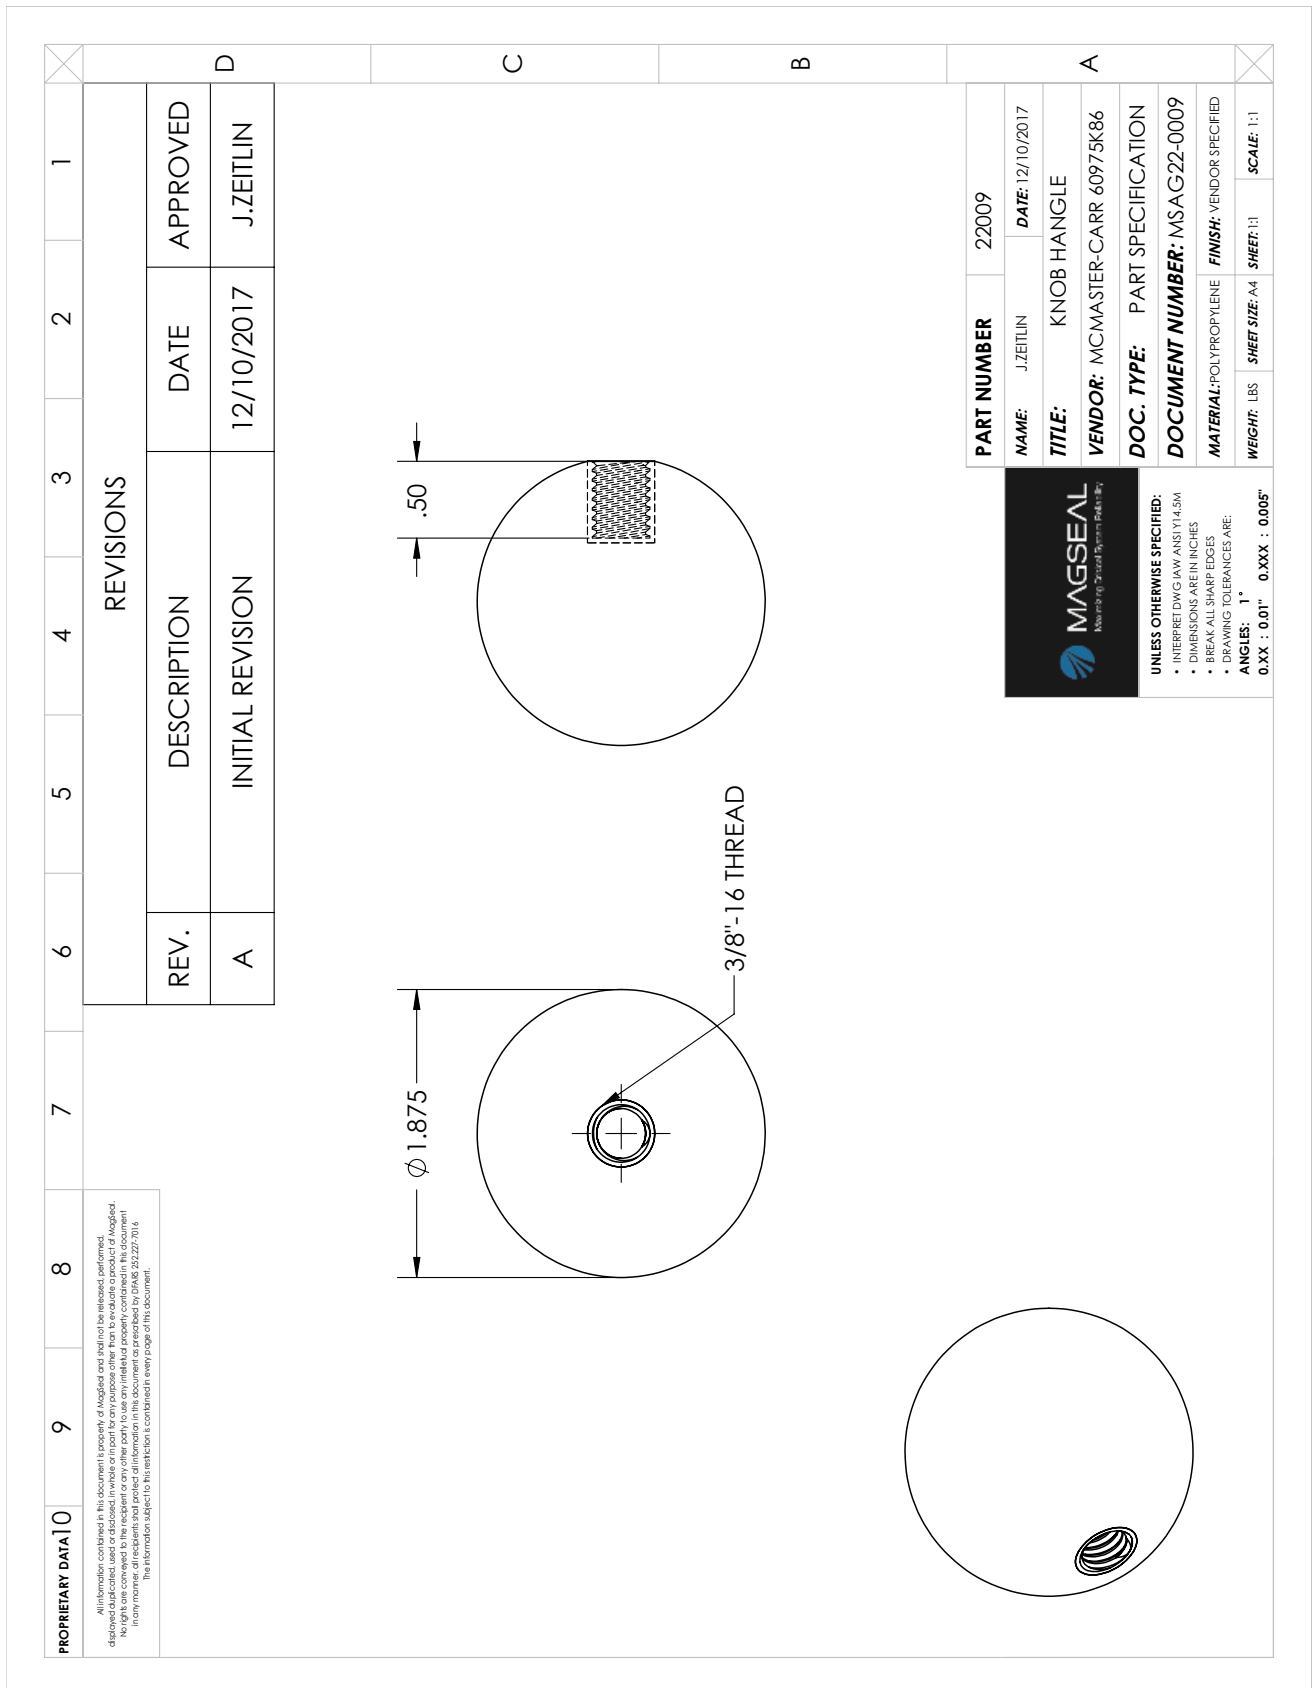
MSAG22-0009 Knob Handle McMaster McMaster
